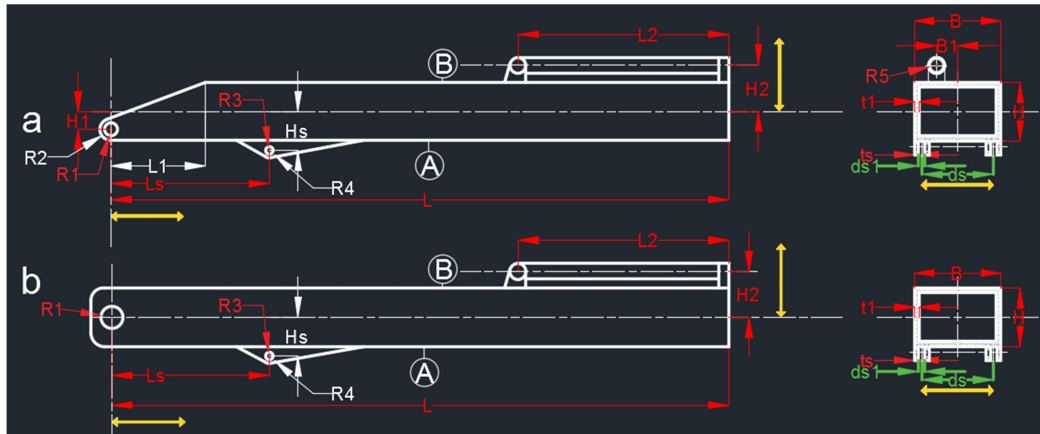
The sketch of arm with a rotating joint and a prismatic joint
